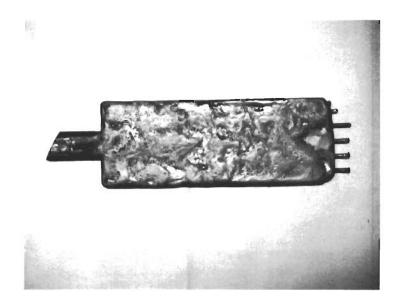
Surface on Flat Plate Casting Exposed to Thick Coating of Flux on Mold Surface
